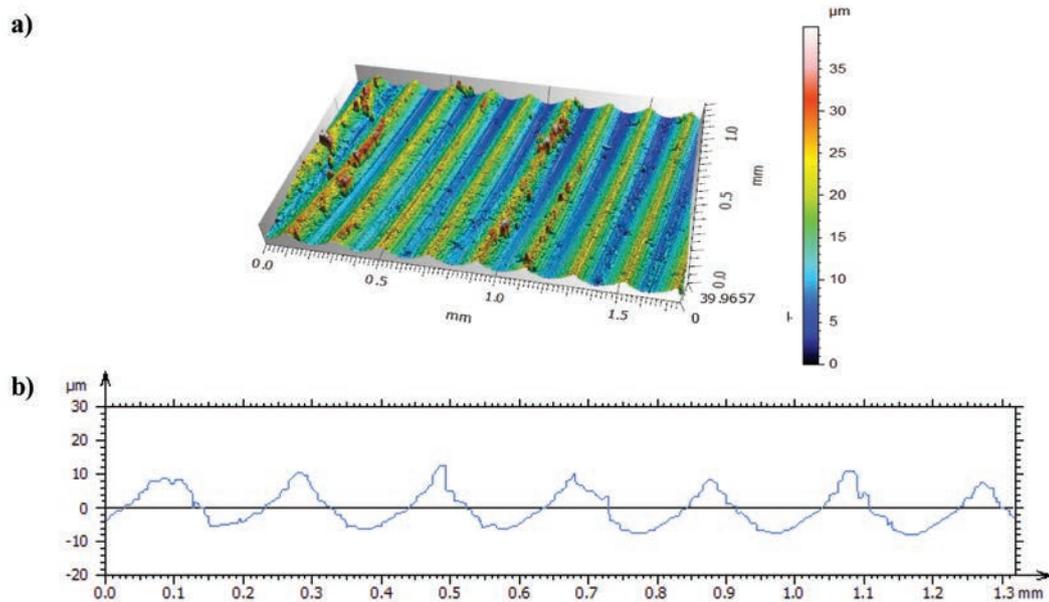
Surface texture of the edge of the workpiece after turning with cutting fluid containing zinc aspartate with a cemented carbide cutting tool: a) isometric view, b) primary profile
